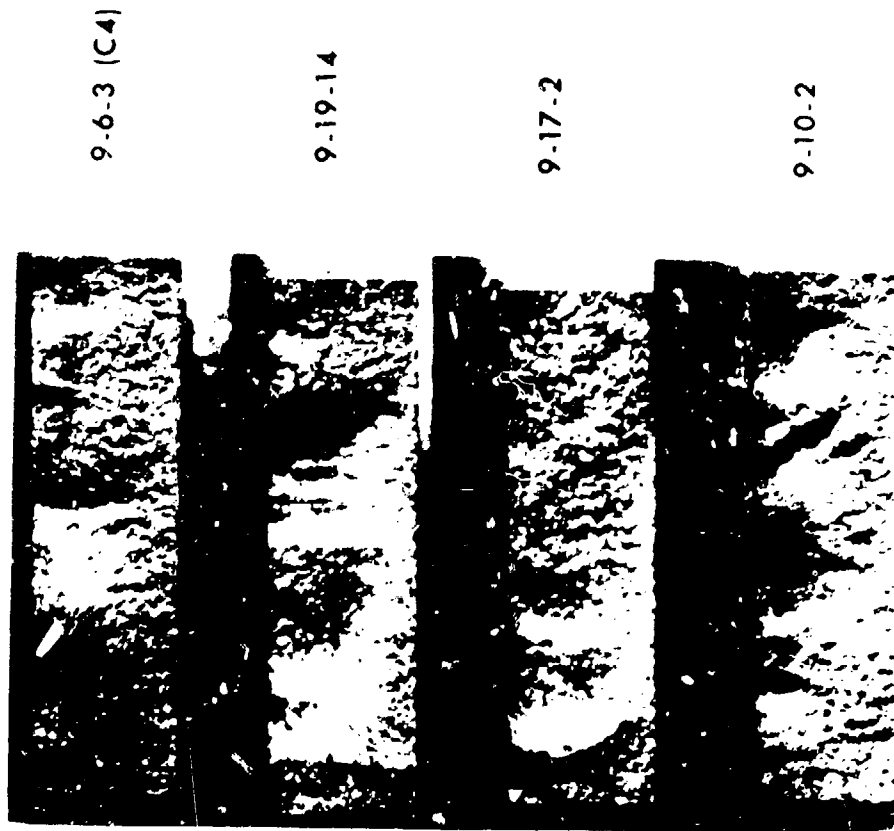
Fracture Surfaces of the Salt Fog Exposure Specimens of Figure 51, With DOW 17 Coating.
